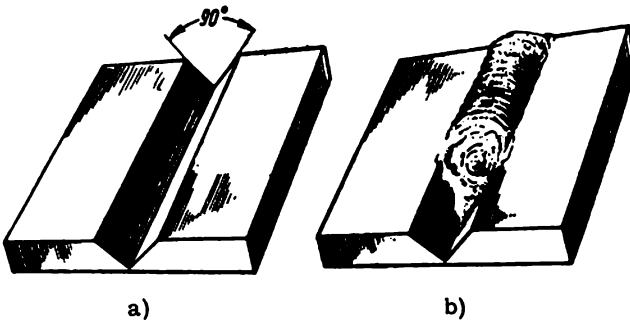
Preparation (beveling) of edges of plates prior to braze welding (a), and the gap between the plates (b) partially filled with molten metal during braze welding
